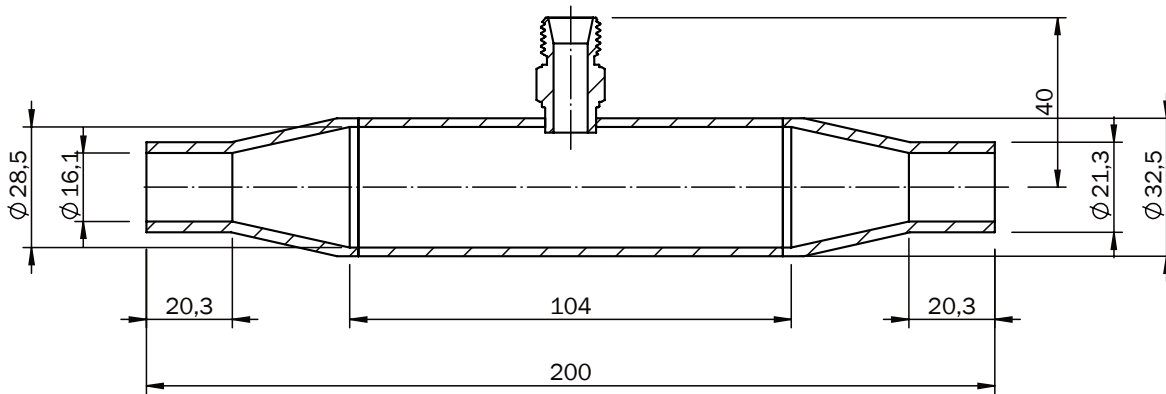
Dimensional drawing for T-piece DN15 (P/N 2123468) with weld end
